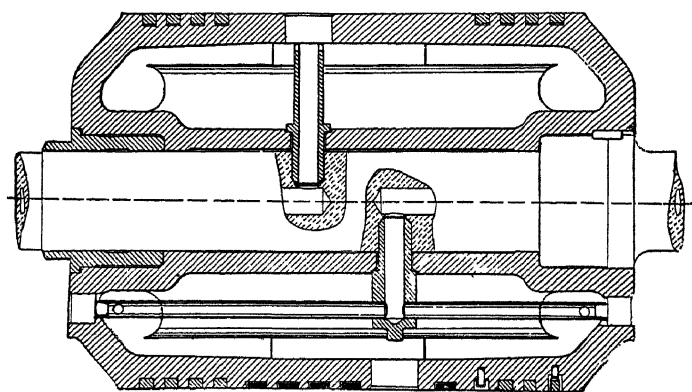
PISTON OF K RTING ENGINE WITH WHITE-METAL BUSHING, AS CONSTRUCTED BY THE GUTEHOFFNUNGSH TTE, OBERHAUSEN.
